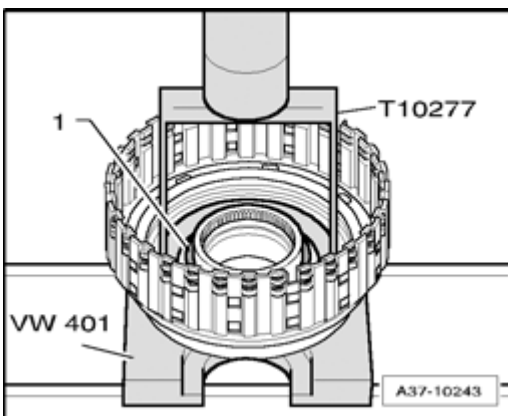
Dished Washer, Installation Bracket T10277 And Circlip
